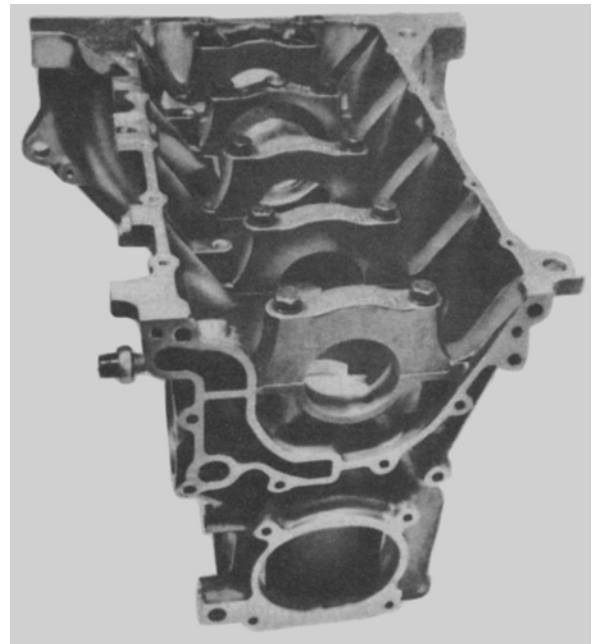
Underside view of an aluminium alloy crankcase for a four-cylinder engine with five main bearings (*Chevrolet*)
